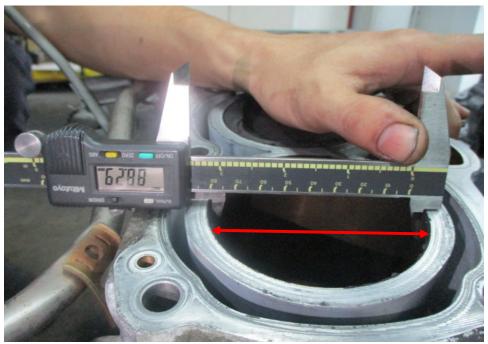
shows measurement being carried out to the bore (arrowed) of cylinder 4 of the Toyota engine. The bore measurement of cylinder 2 was recorded to be 88.29mm.
